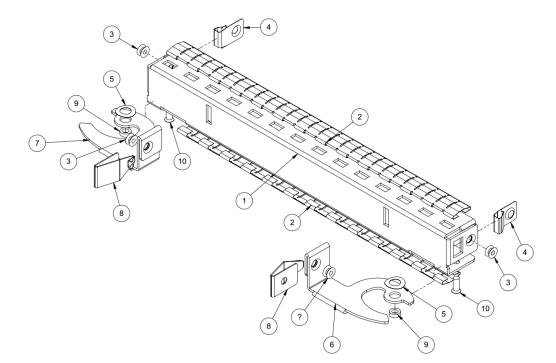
Large Card I/O Bracket with Ejector (3D View)
